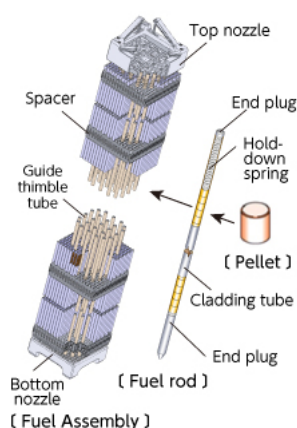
A sketch of a fuel assembly and nuclear fuel pellets inserted in the core of a reactor [32].
